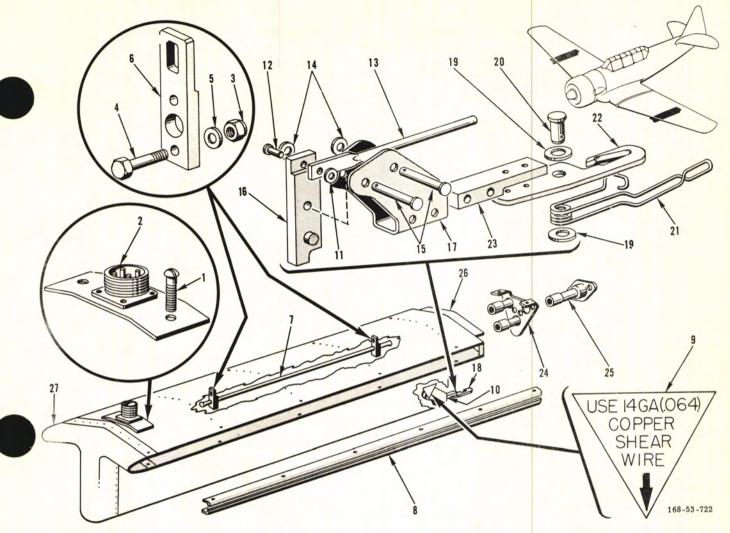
B	_	ROCKET	T.AUNCHER	ASSEMBLY
